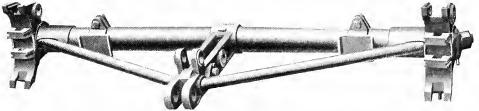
National Hollow Brake Beam for Six-Wheel Trucks.
